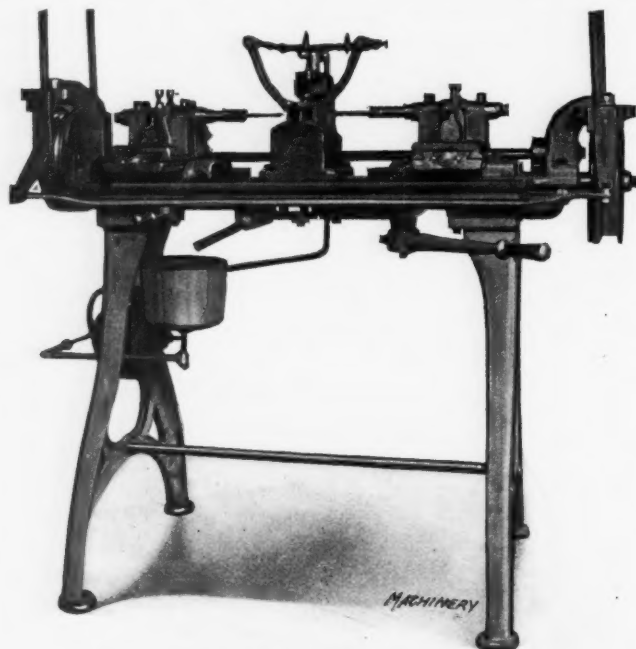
Front View of Langelier Four-spindle Drilling and Tapping Machine
